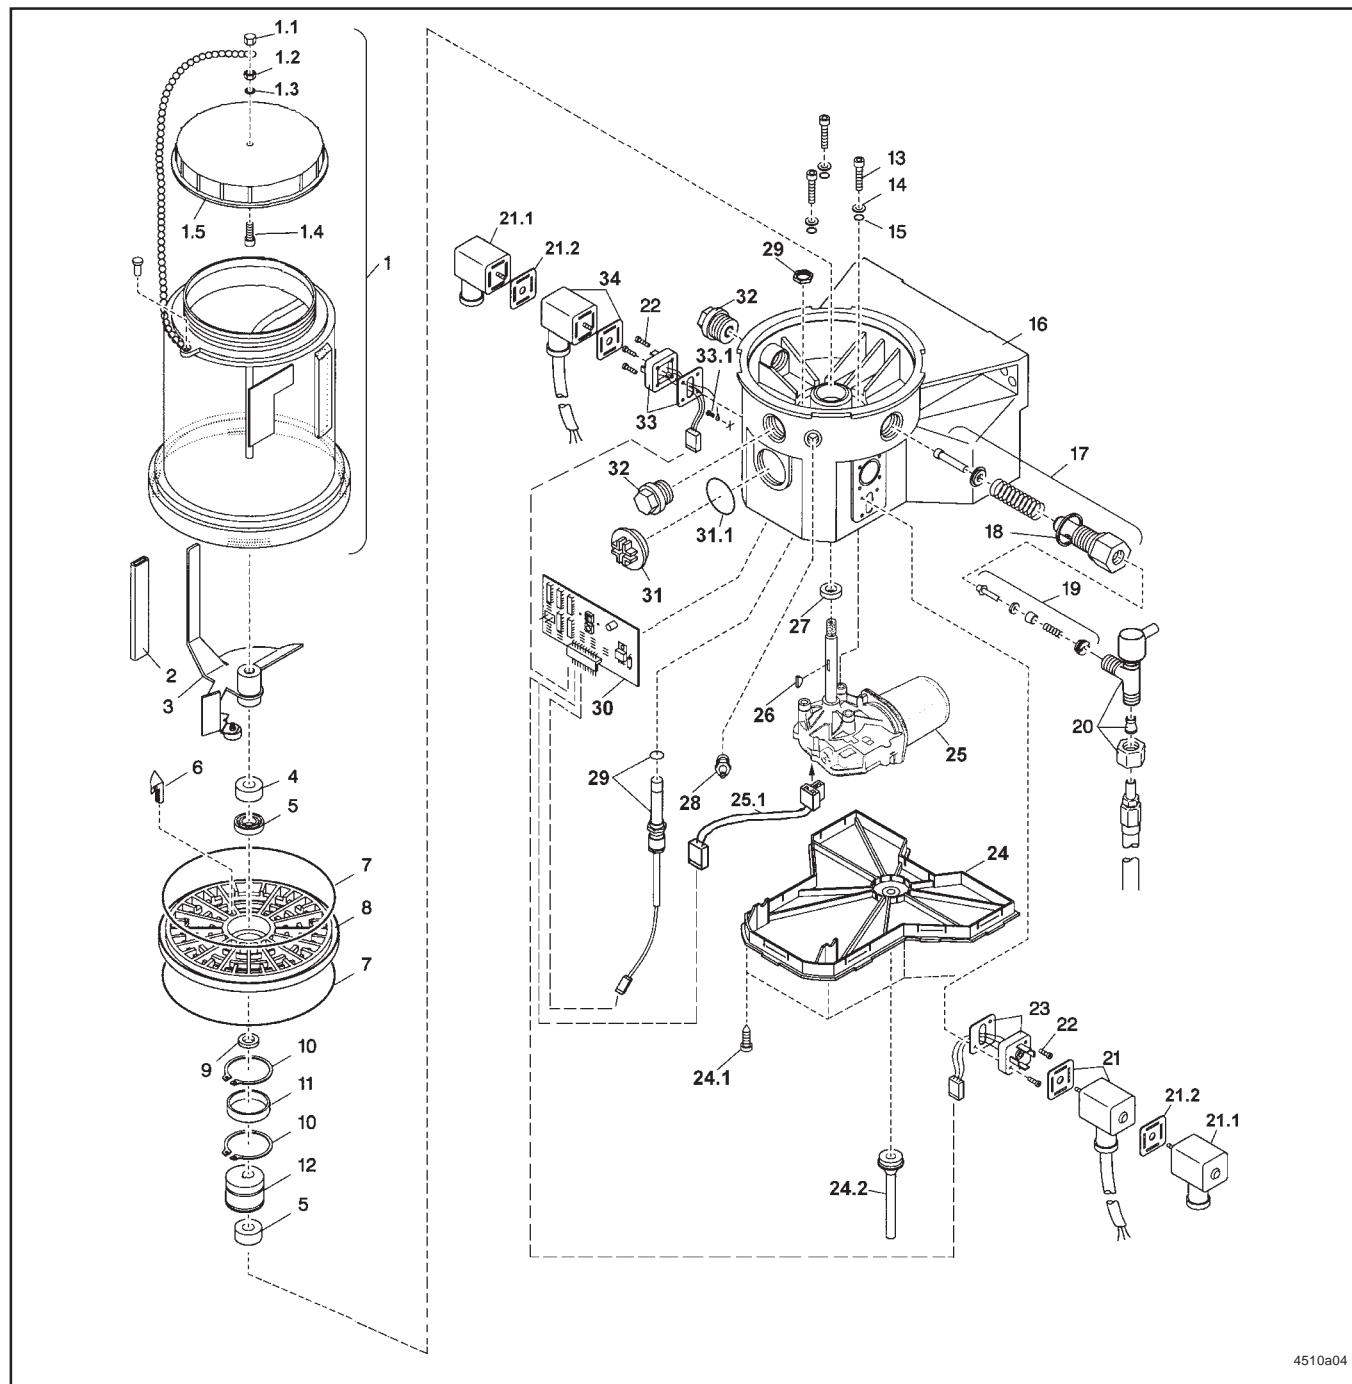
Explosion view for P 203 -2XLBO-K-12/24--2A1.01/10-V 10 - V13, V20 - V23
